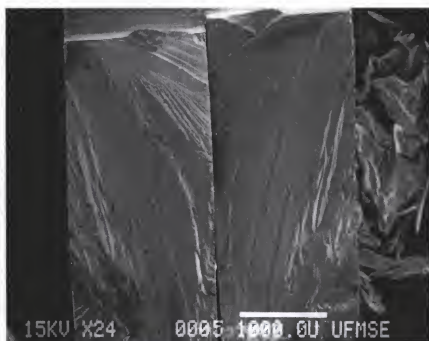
Fracture surface of a double-notched tension specimen showing multiple cleavage facets on the fracture surface.
